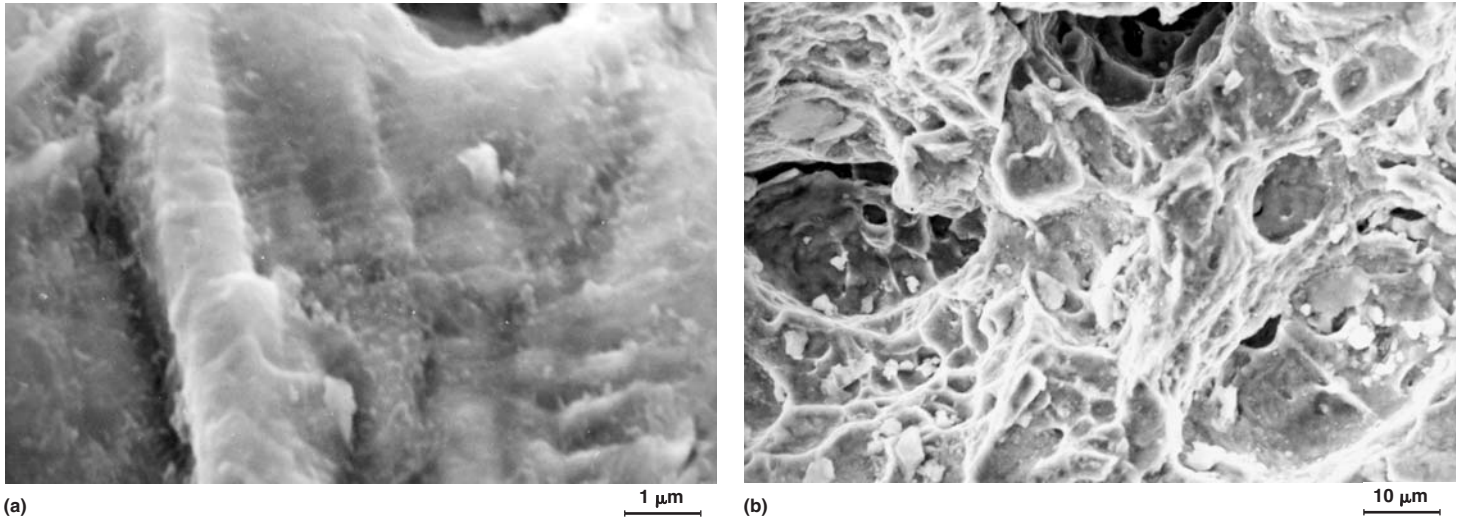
(a) SEM fractograph of bolt M-1 showing fatigue striations. (b) SEM fractograph of bolt M-1 showing dimples in the fast-fracture region
